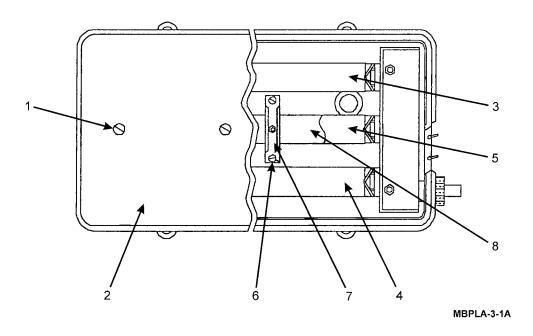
Fluorescent Light Fixture Lamp and Starter
